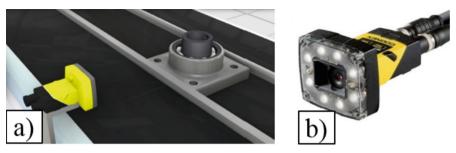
Checking bearing installation - a) design of camera placement for bearing assembly inspection b) Cognex In-sight 2000 camera [13].
